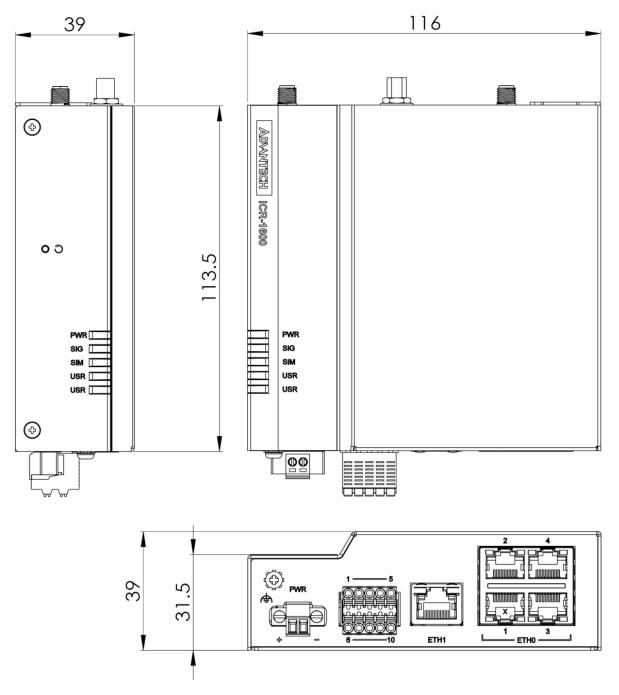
Router Dimensions - Front, Top and Right view for basic set
